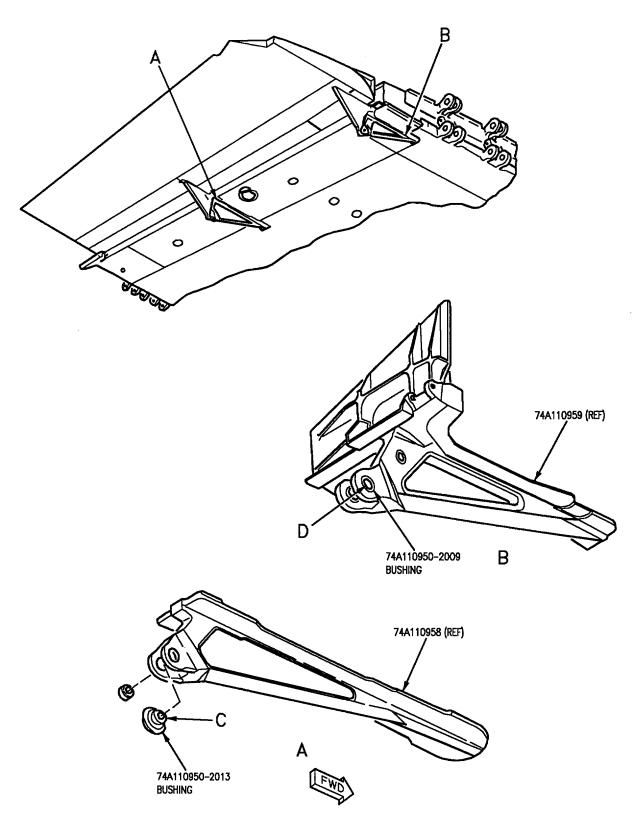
Bushings, Trailing Edge Flap Hinges, Removal and Installation (Sheet 1)
